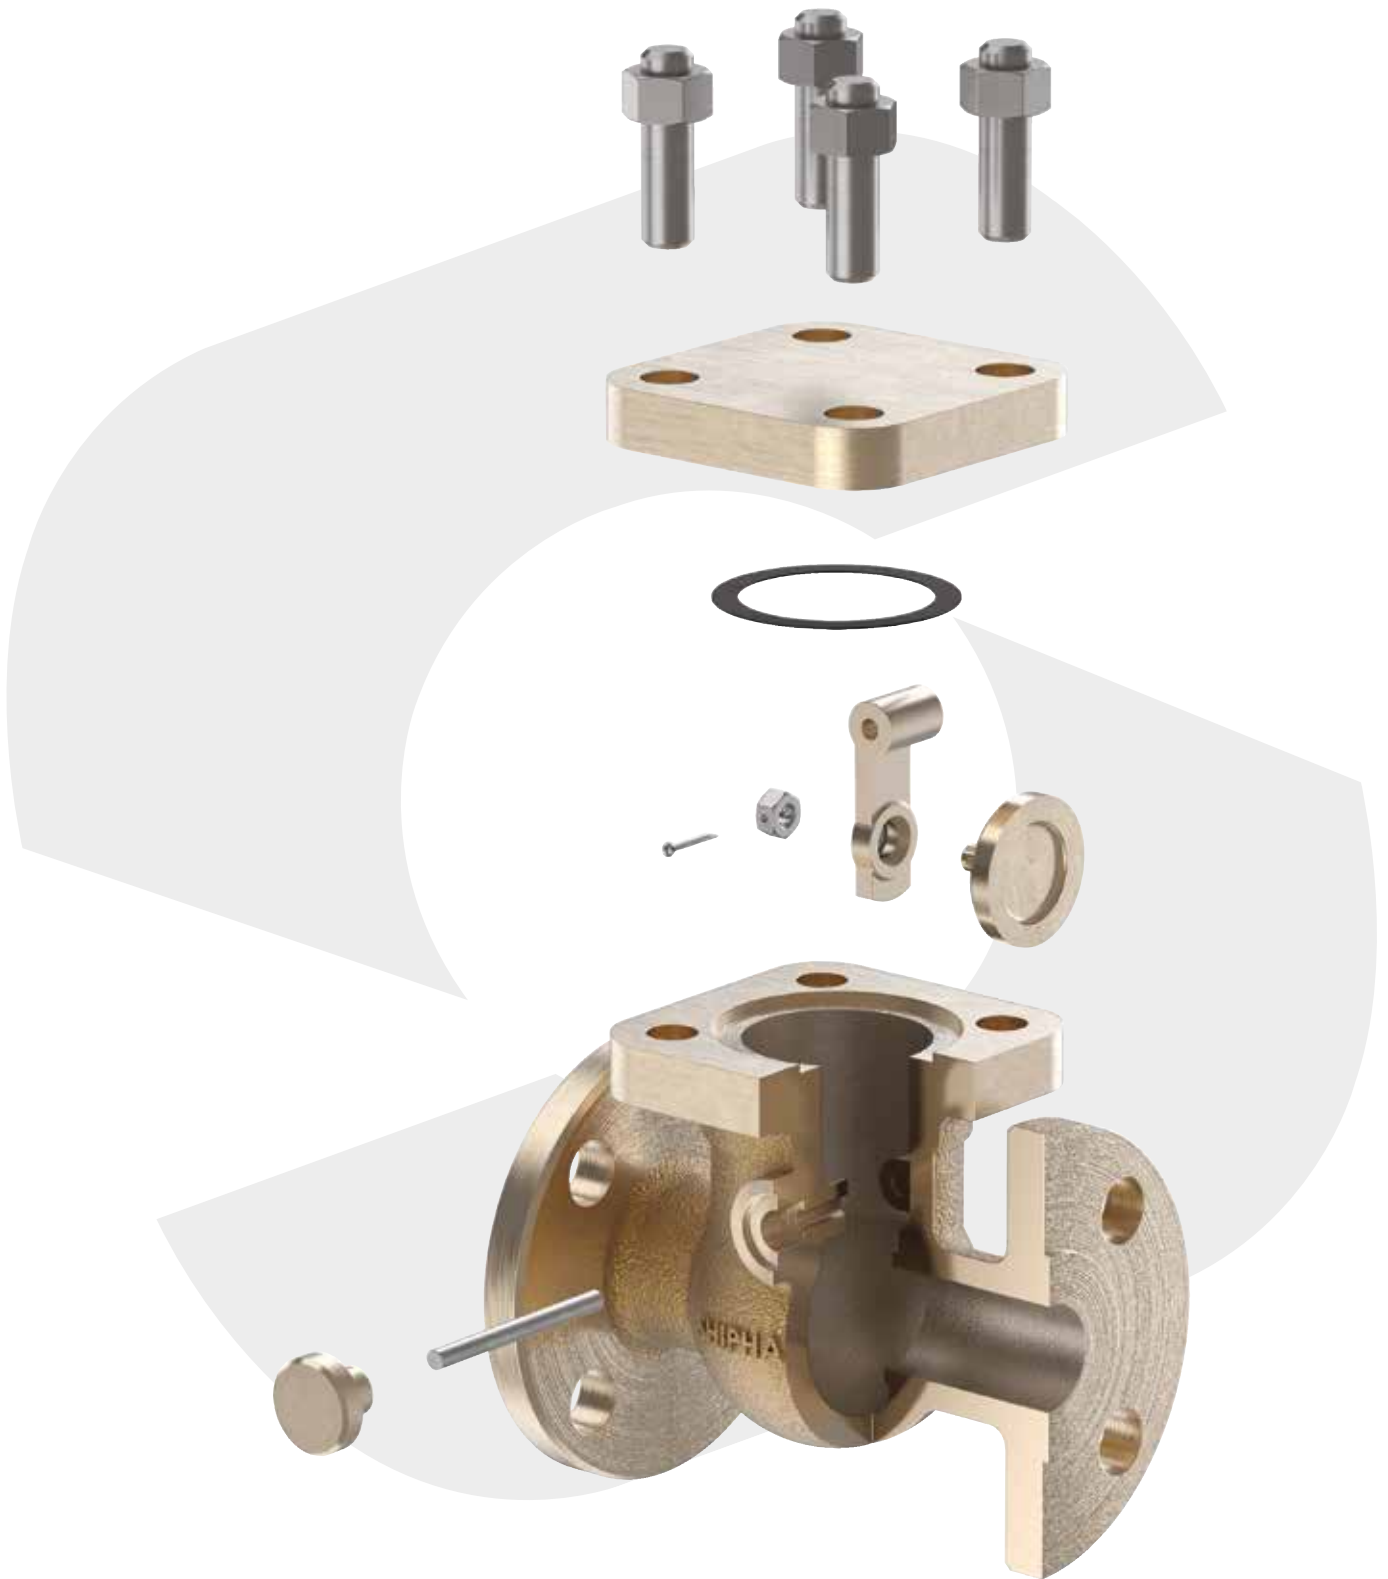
Swing check valve with bolted bonnet - 3D exploded view (SC04)
